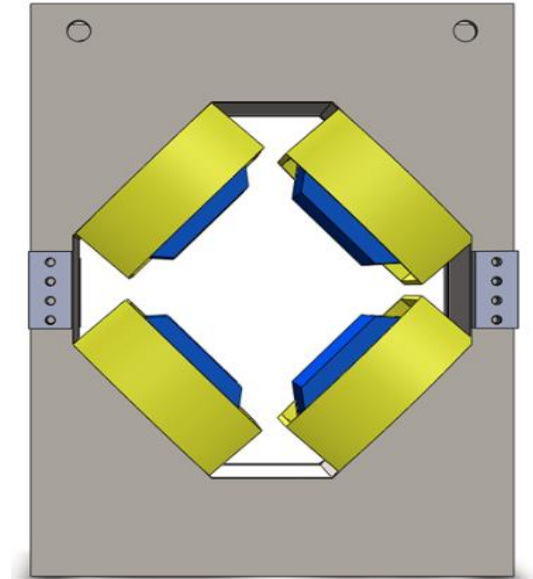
(Front view of 3Dmodling for Quadrpool magnet)
